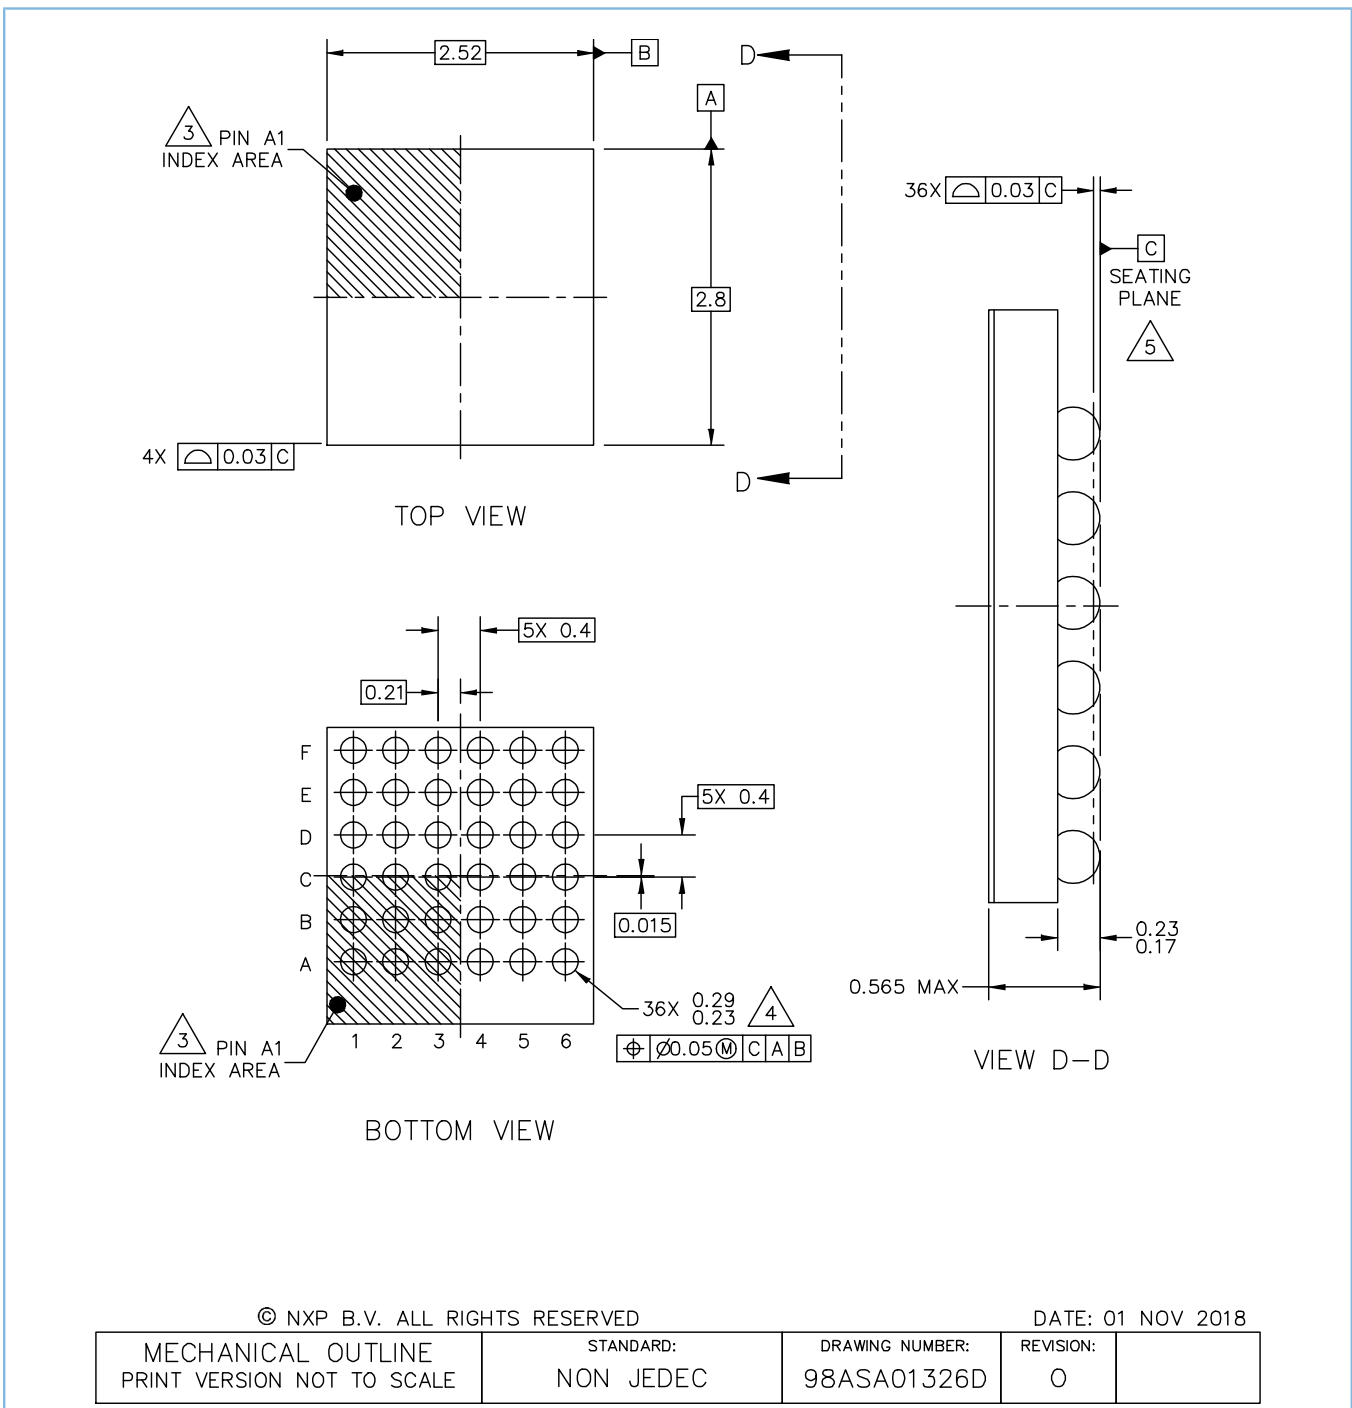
Package outline WLCSP36 (SOT1780-9); with back side coating
